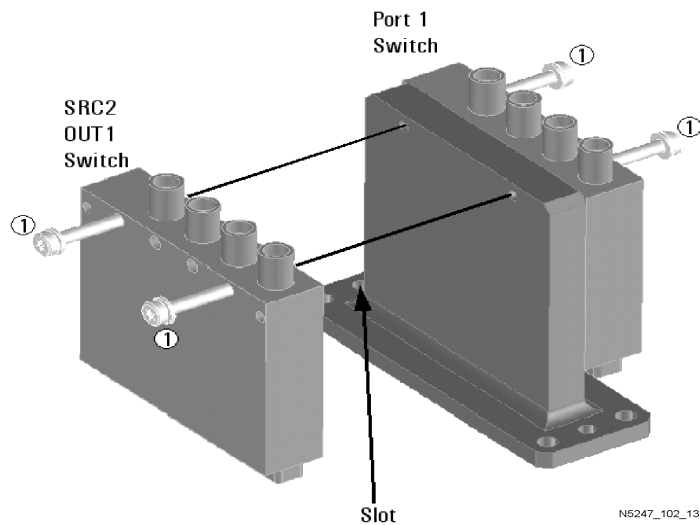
A50 and A51 Mechanical Switches Assembly (N1811-80010, N5247-220130, 0515-0375)
